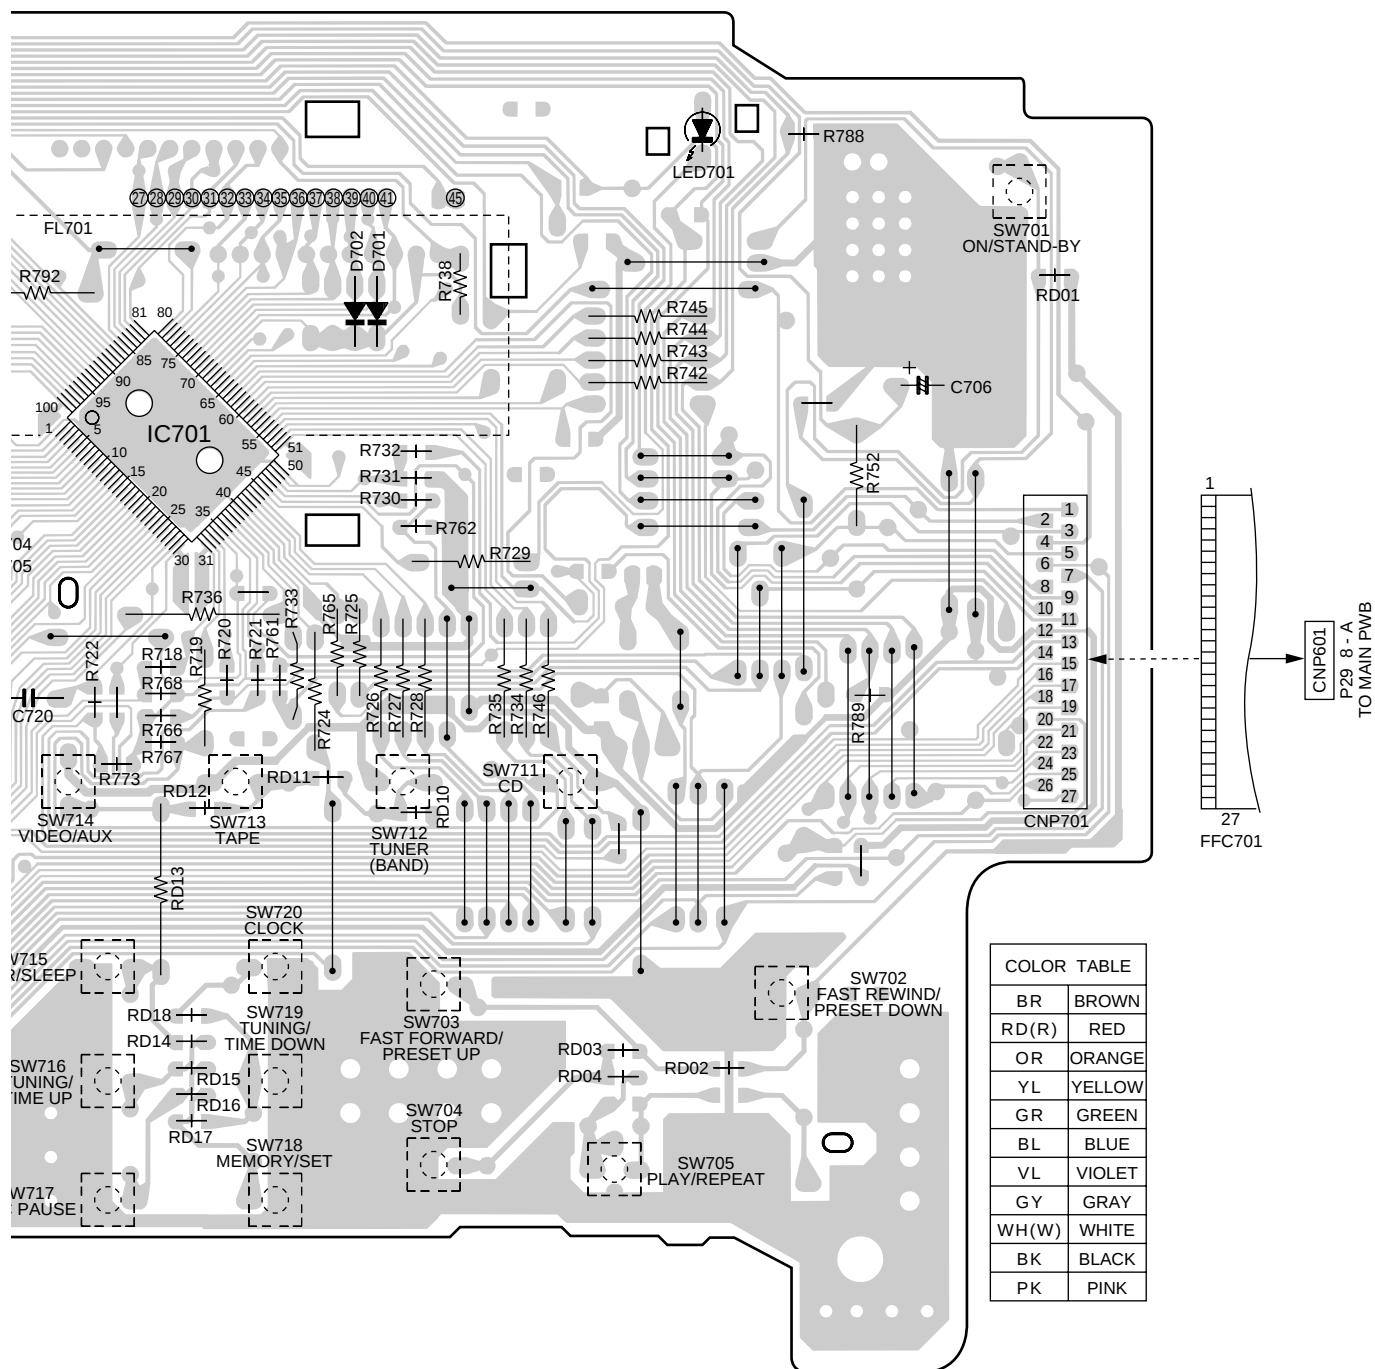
WIRING SIDE OF P.W.BOARD (4/7)
